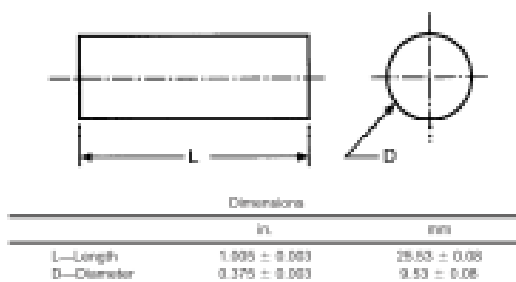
Machined P/M Compressive Yield Strength Test Specimen
